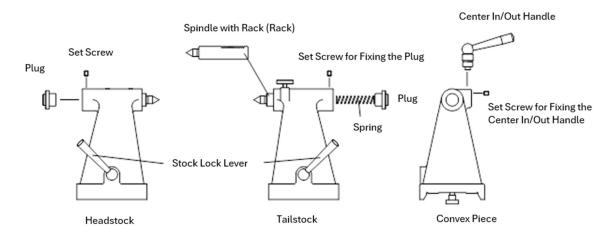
Adjustment of the Convex Piece and the Center In/Out Handle
